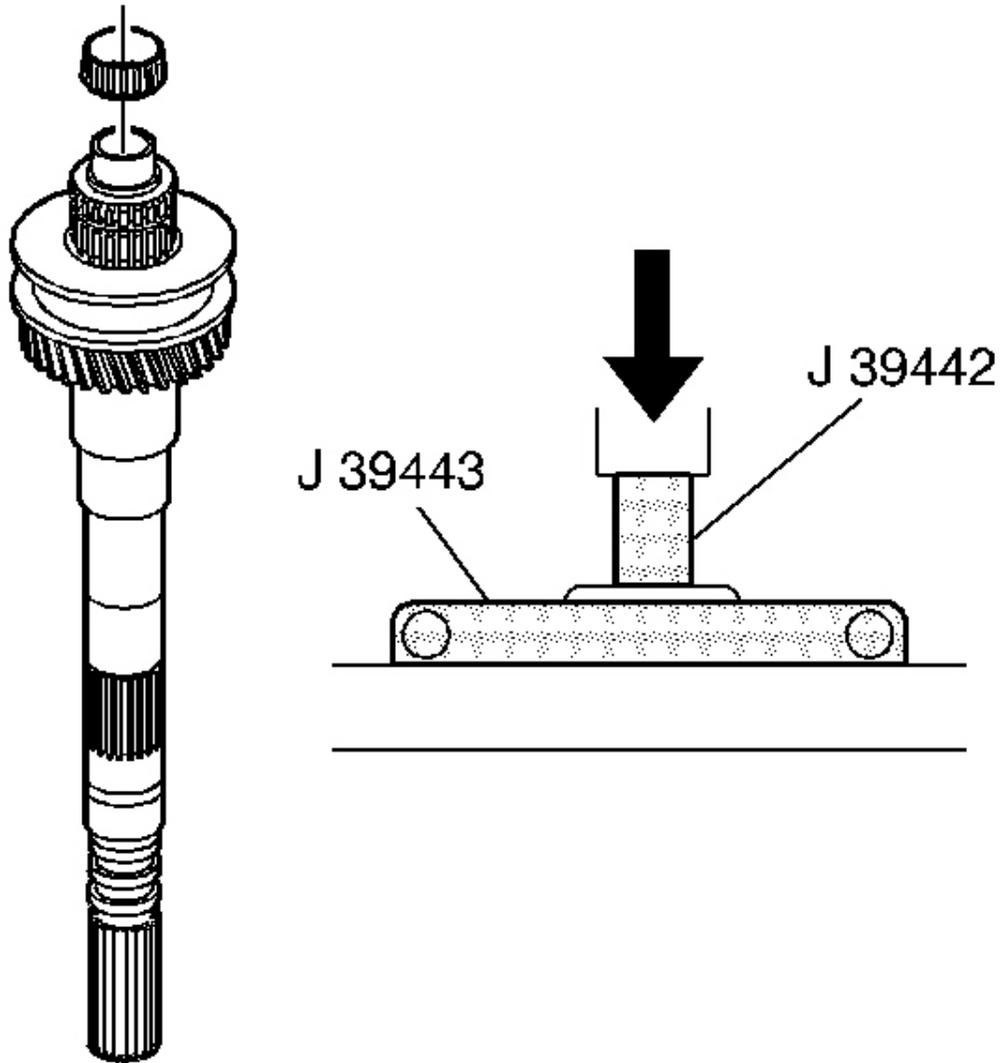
Removing Mainshaft Small Tapered Bearing Using J 39442 & J 39443
